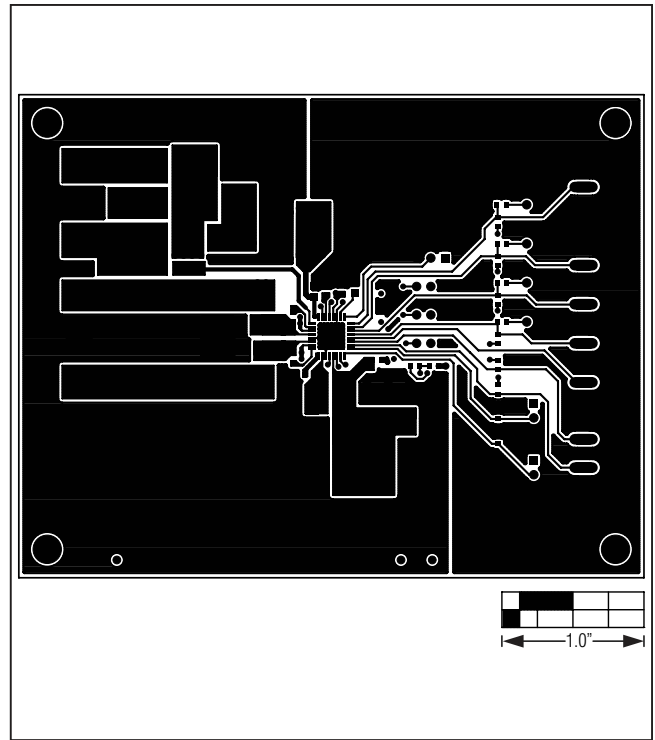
MAX16920B EV Kit PCB Layout—Component Side
